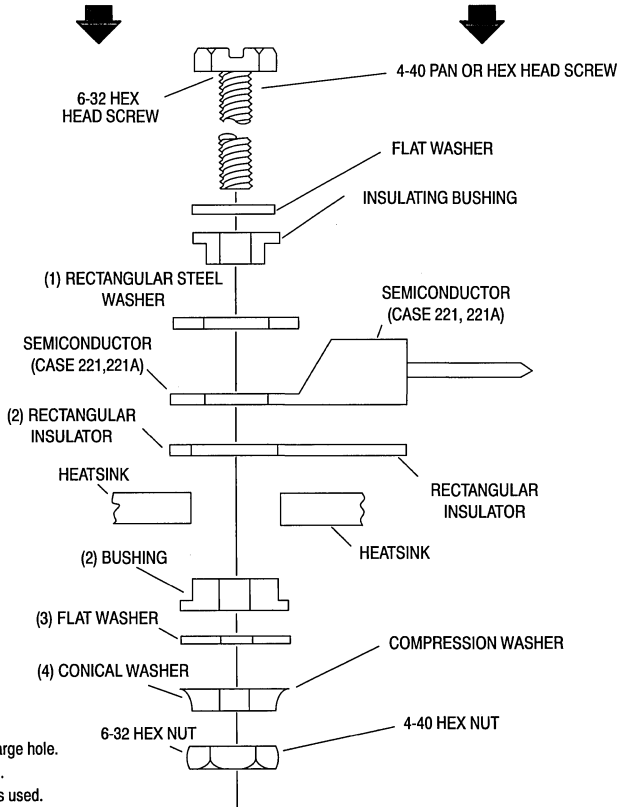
Mounting Arrangements for Tab Mount TO-220
